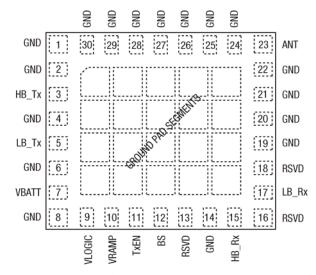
Phone PCB Layout Footprint for 7 mm x 6 mm, 30-Pad Package – SKY77552 Specific
